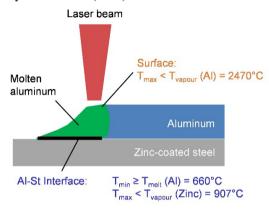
Schematic illustration of laser weld-braze process for fillet weld condition.
